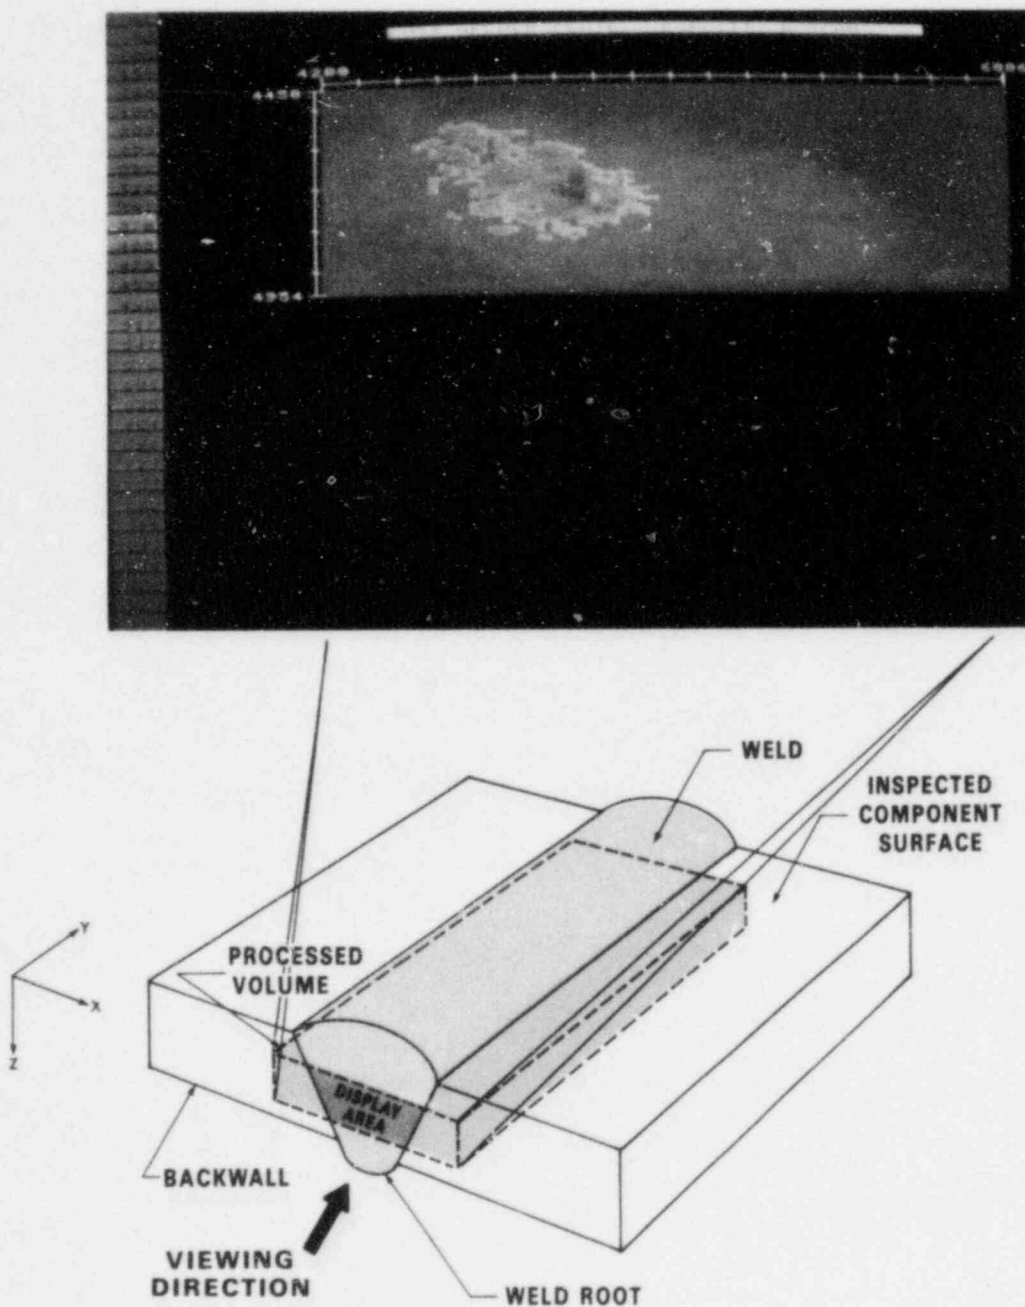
BUTT-WELDED CARBON STEEL PLATE SPECIMEN - POROSITY
